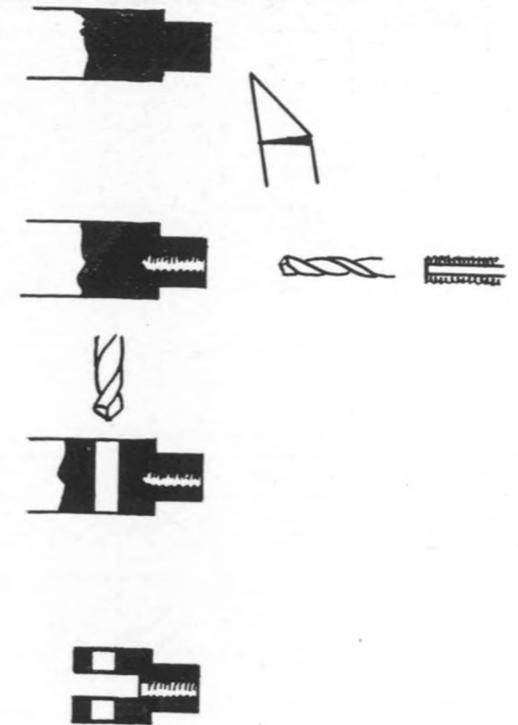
Sequence of operations for making the Valve spindle fork-end.
